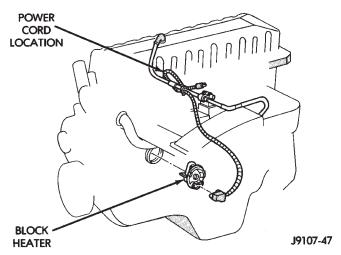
Heater and Cord—4.0L 6-Cylinder Engine
